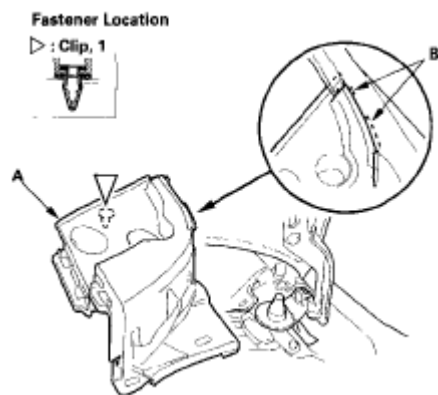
Removing Cover By Releasing Hooks Form Front Fender
